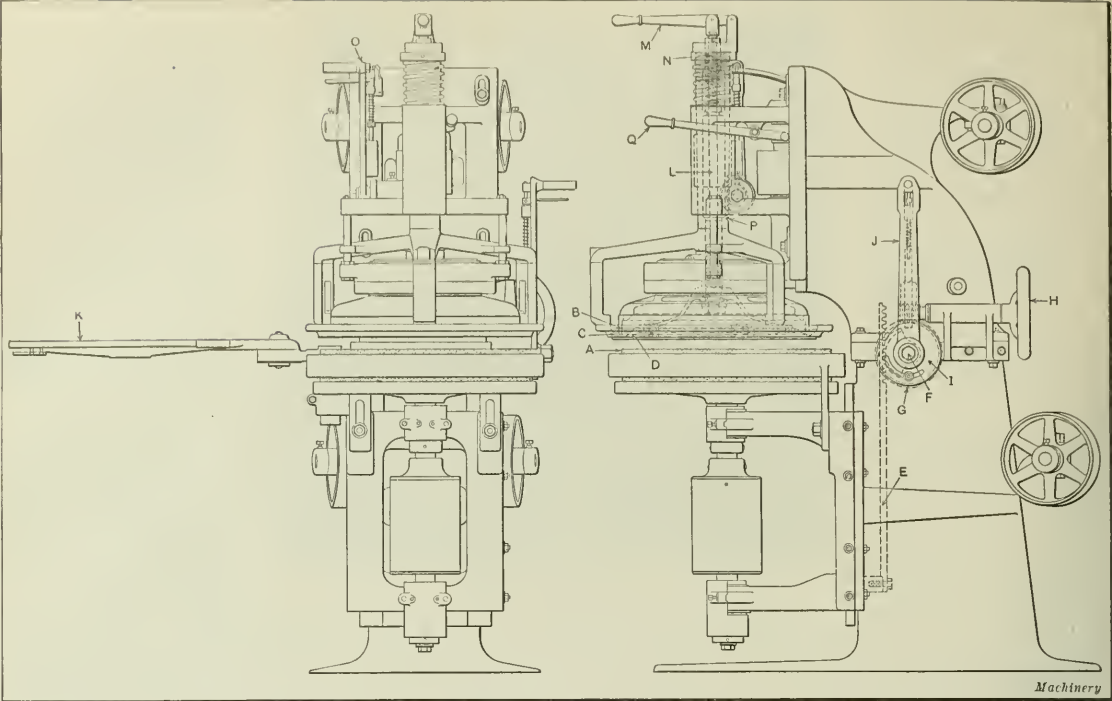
Front and Side Views of Dry-grinding Machine, illustrating Principle of Operation
